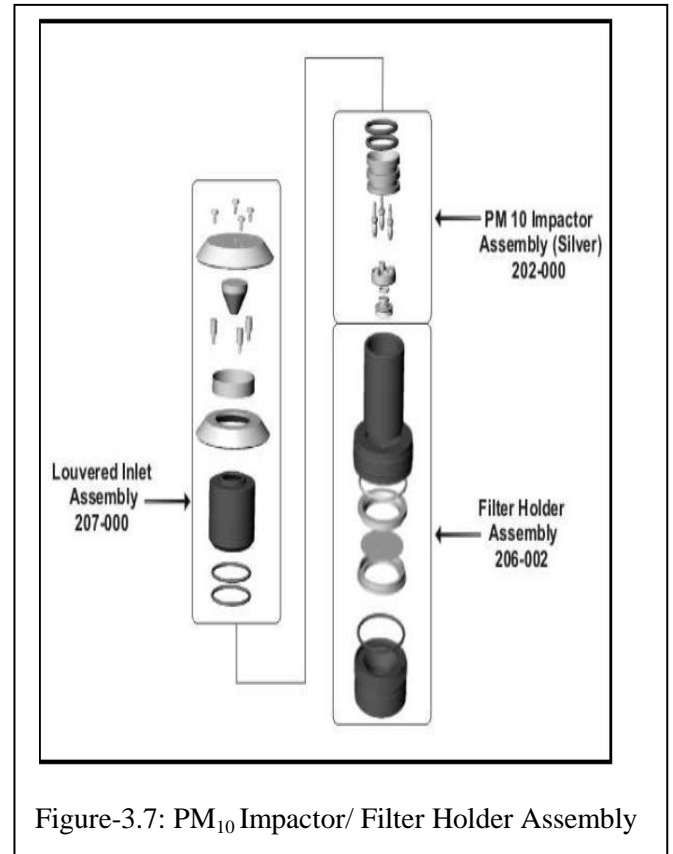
PM₁₀ Impactor/ Filter Holder Assembly
